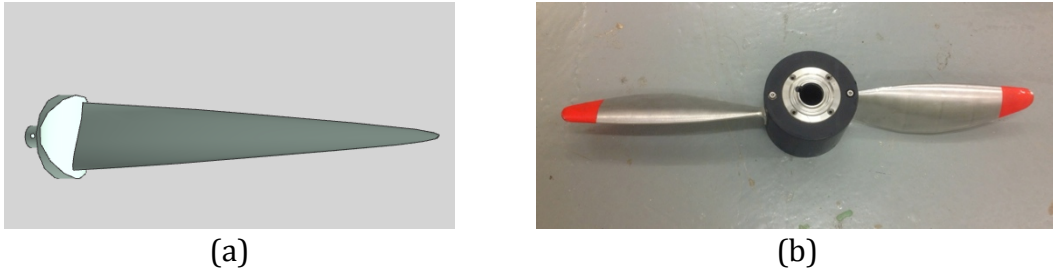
Comparison of (a) final propeller CAD and (b) manufactured blade.
